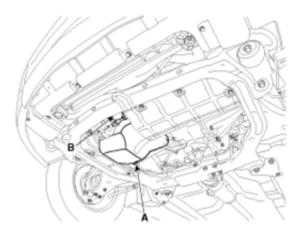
Identifying Oil Filter & Oil Drain Plug Courtesy of KIA MOTORS AMERICA, INC.
